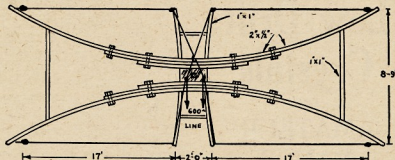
Constructional Details of the Cheap Beam. Plan of the bows and cradle.
